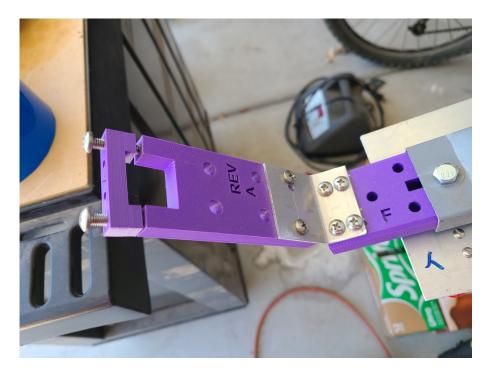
Sliding Insert, Angle Bracket and Horn Mount
